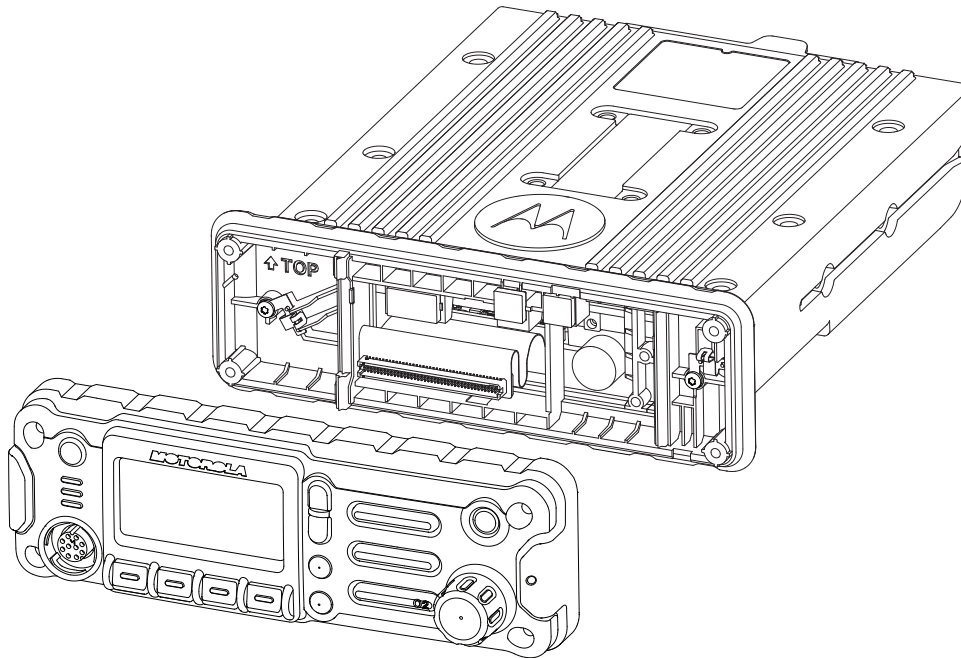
Installing the Transceiver Flex onto the Front Housing Assembly
